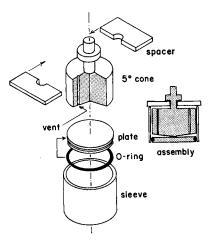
Cone-plate sample holder for irradiation and testing. Sleeve removed during testing.
